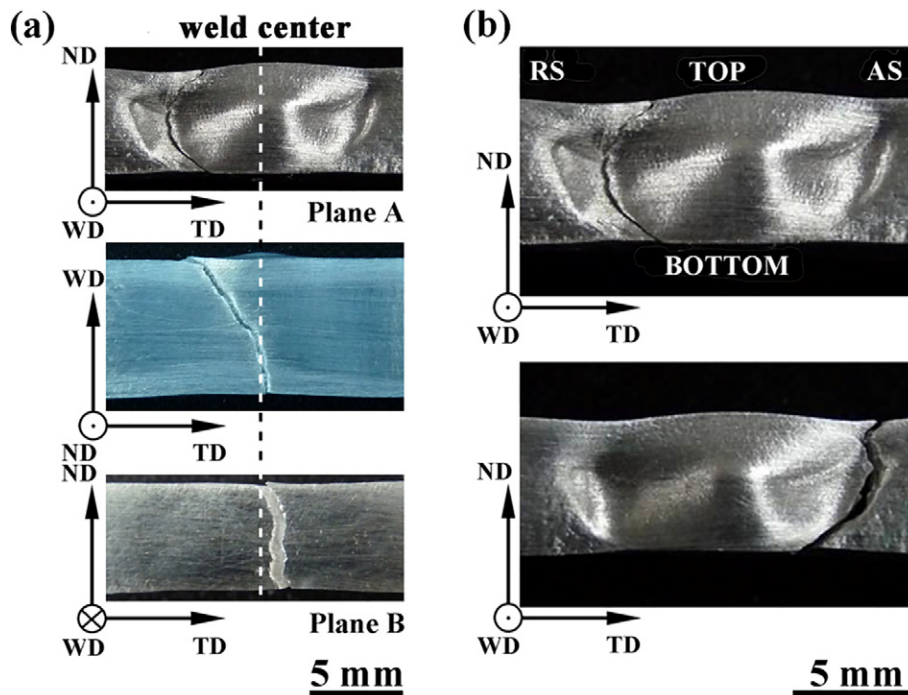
Macroscopic images of failed FSW joints showing: (a) specific crack propagation path, (b) two possible fracture locations.
